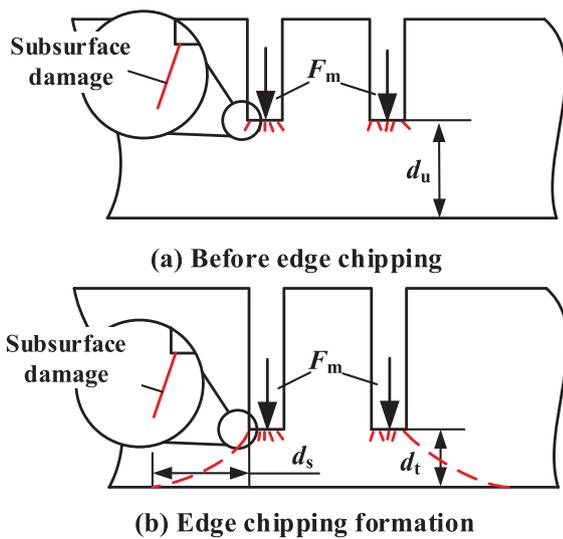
Formation mechanism of edge chipping at hole exit [59].
